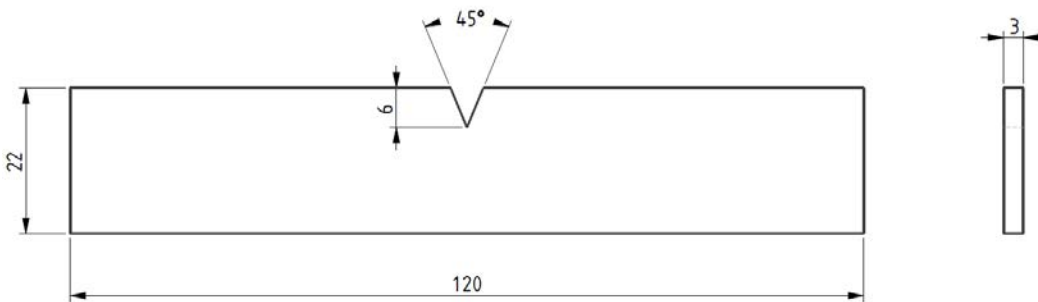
2D technical drawing of the sharp V-notch specimens that have been used for fatigue tests.
